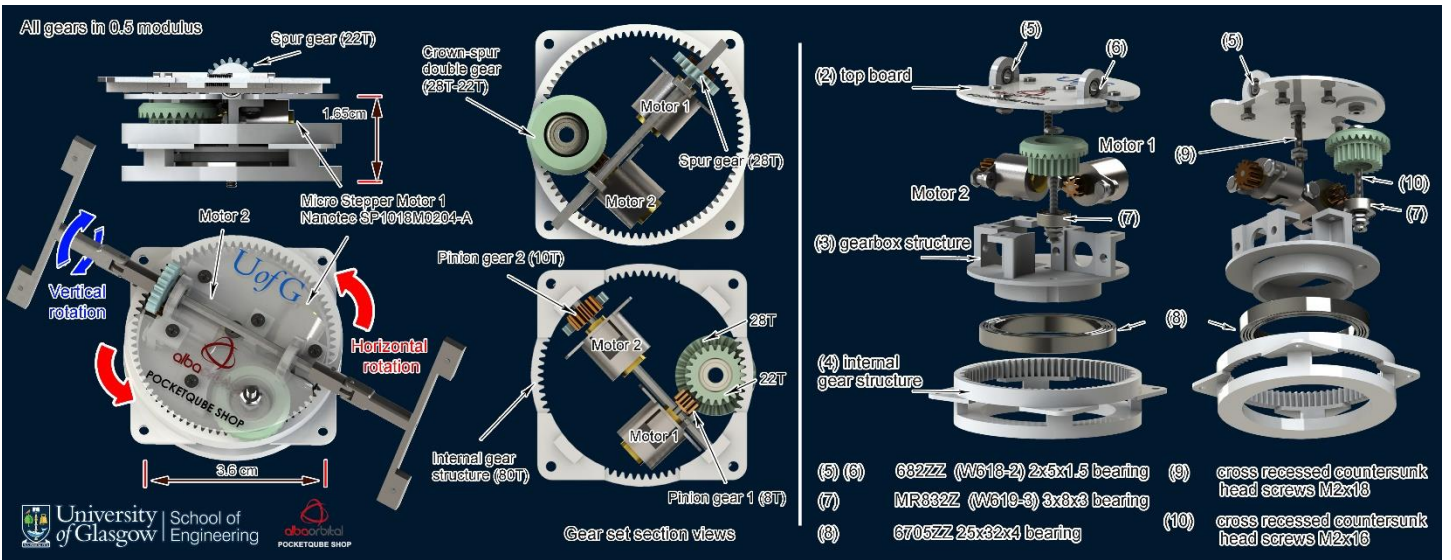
Left: Layout of Gear Set and Motors; Right: Layout of Bearings and Screws
